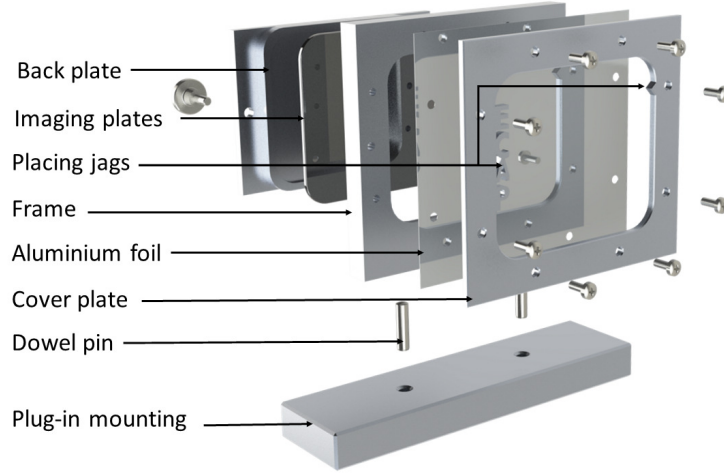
Exploded assembly view of the IP holder and the plug-in mounting socket. The IPS are put into the frame and held with the back plate in place. The thin aluminum is used to protect the IPS from visible light.
